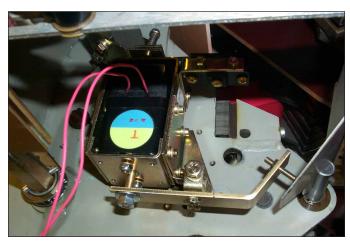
Overview: Reset Finger and DTA Assembly Installed in the Breaker.
